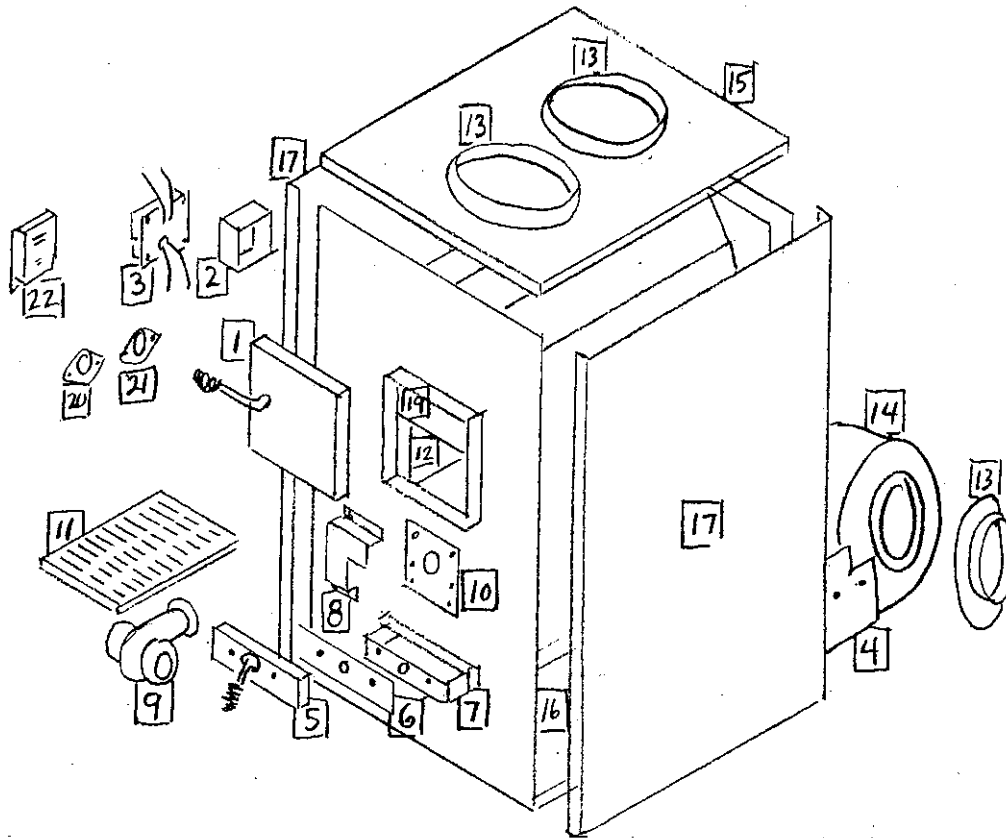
PARTS LIST - MODEL 832 DAKA FURNACE
